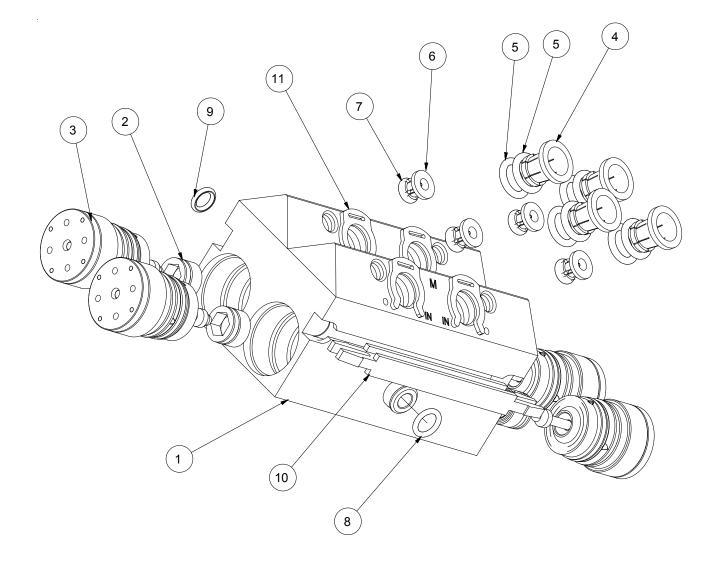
A10732 (Metric) & A10962 (English) 4-Color Valve Dead Head Assembly
